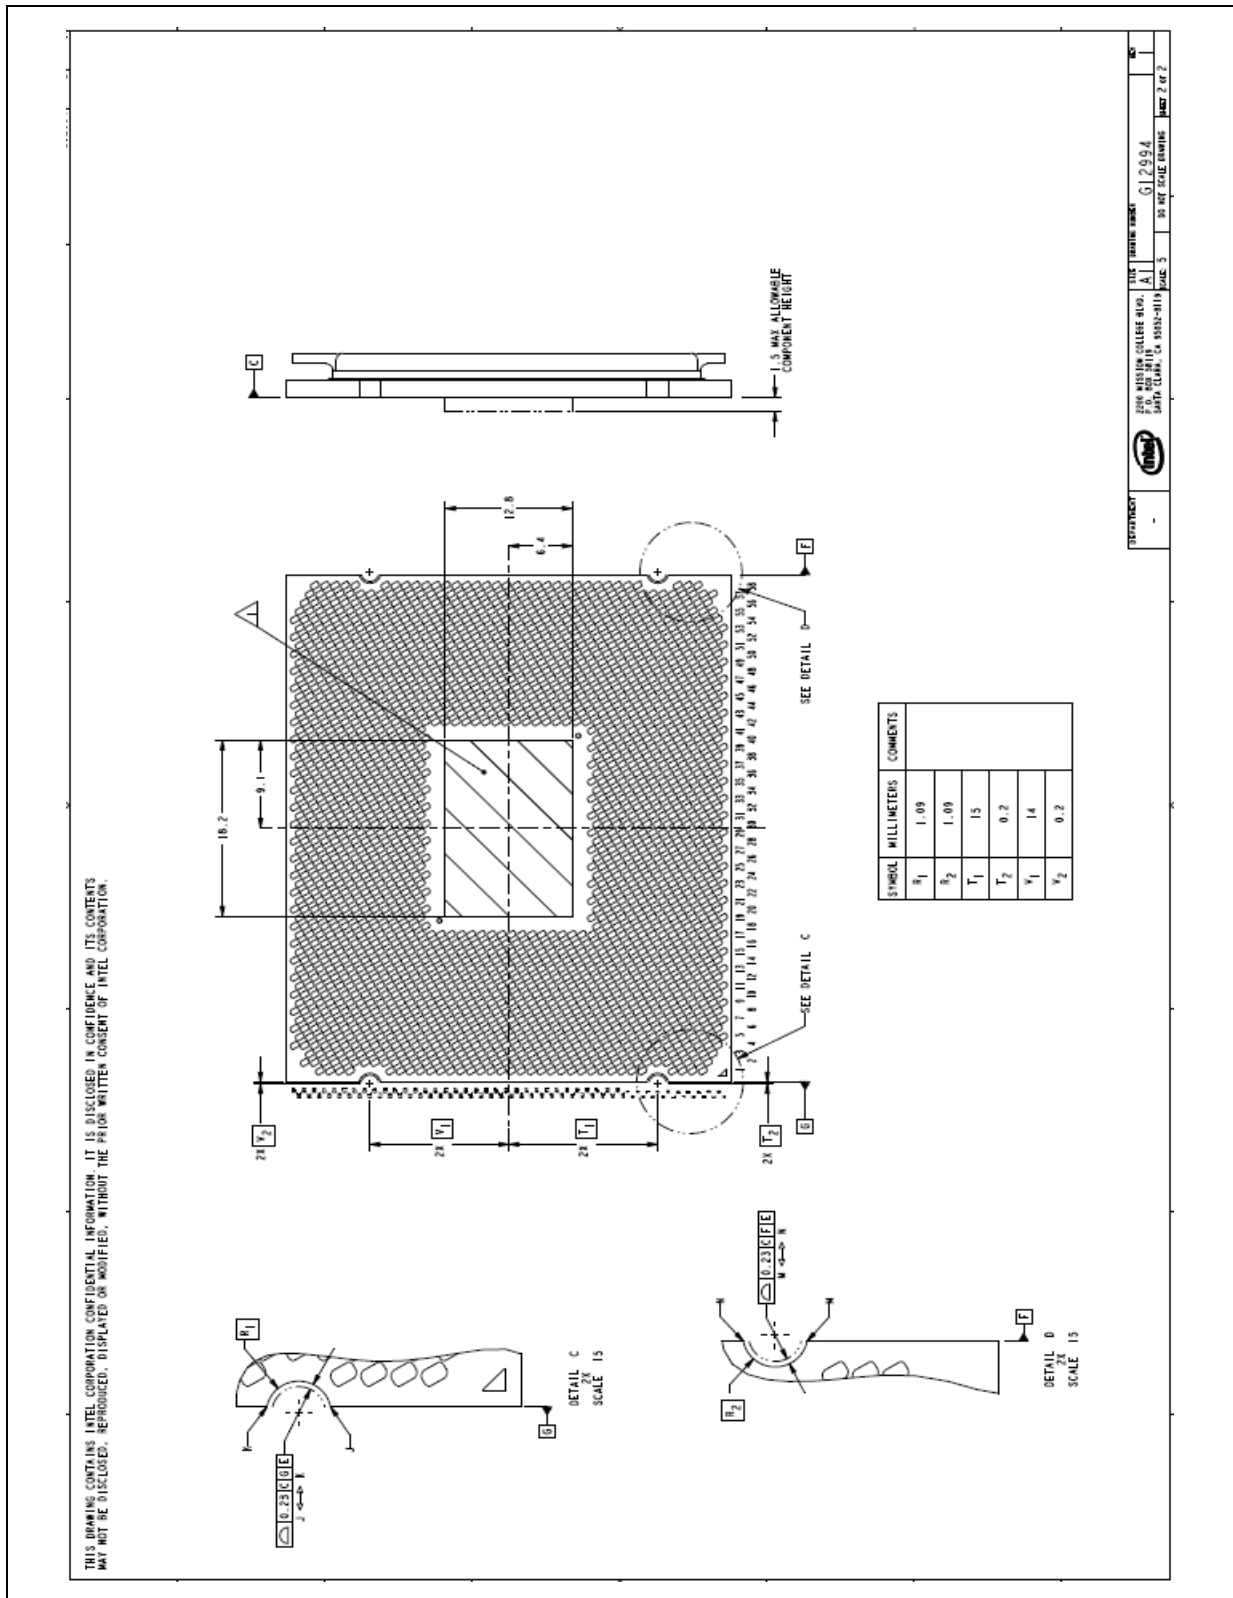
Processor Package Drawing Sheet 2 of 2
